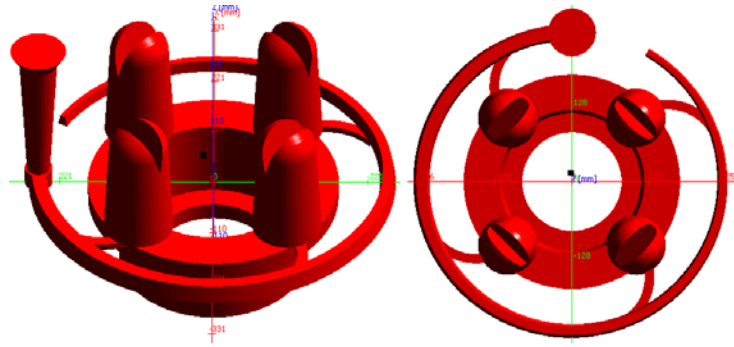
Combined bottom and top filling of a flange-shaped cast iron casting. Tangential thin gates have been employed in this case to prevent the melt impinging directly on the central sand core, which may cause sand erosion, (Kotas, 2008). This casting has been used in a course on modeling of casting processes as an example of an improperly positioned gating system.
